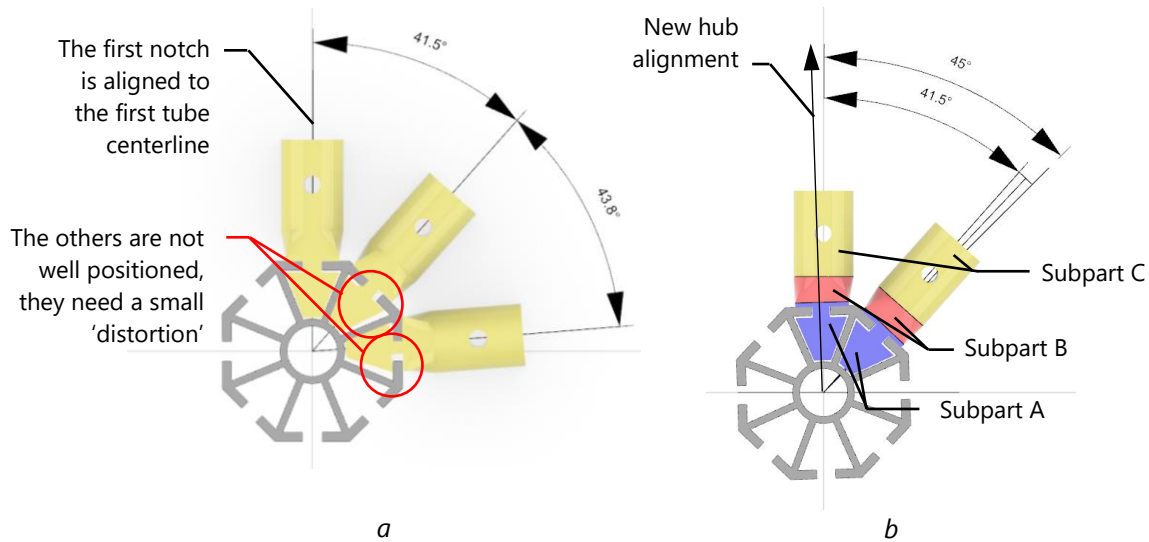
Interconnecting parts: (a) parts requiring adjustments; (b) separated subparts and the parts adjusted.
